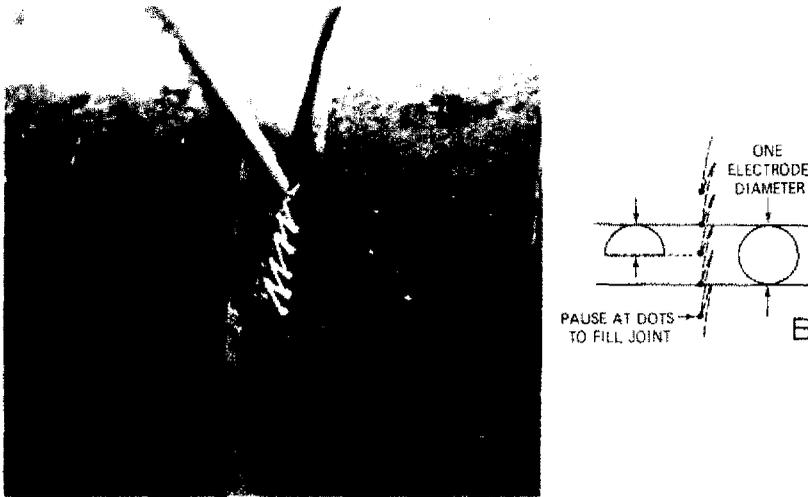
Correct electrode angle for vertical uphill welding of the root bead of a pipe joint.
